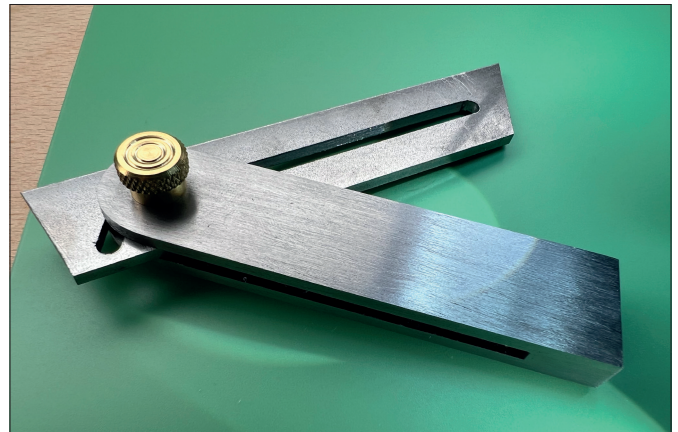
An angle measuring tool produced during the Hand and Machine Skills course, with some work still to be done on it.
